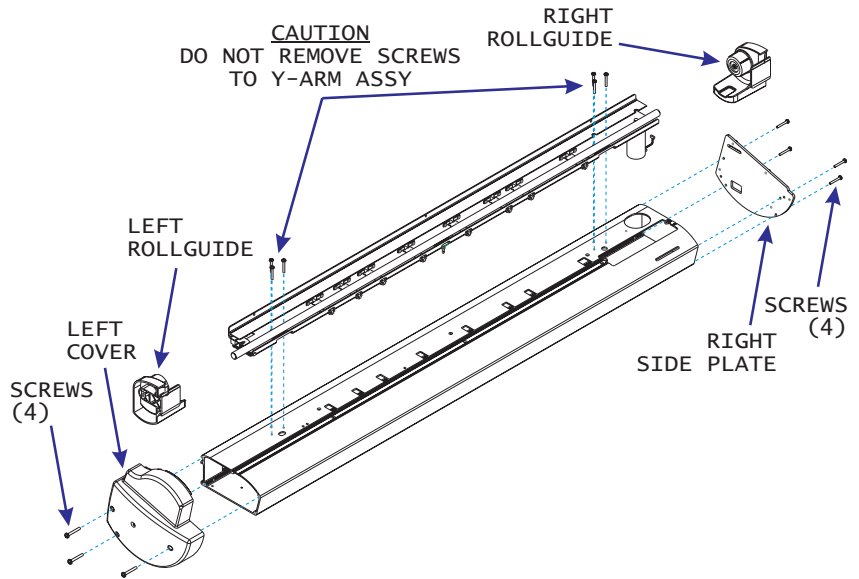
Disassembly of Plotter Prior to Removing the Inner Platen Parts.
